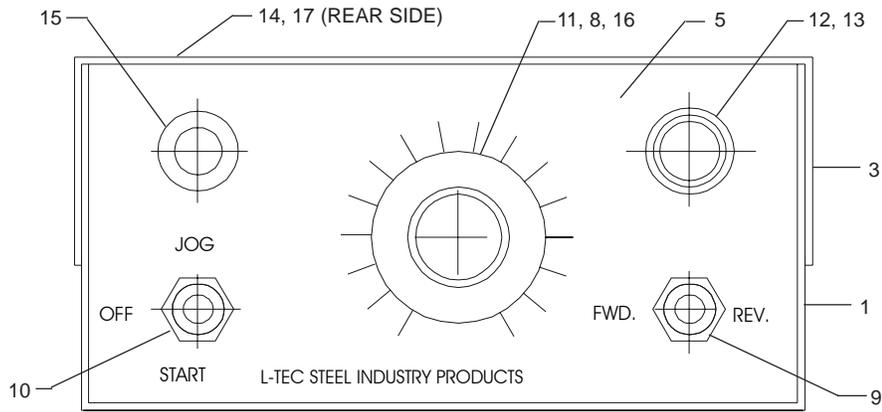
SIP Ultra-Line Carriage Assembly, PN 2225235
